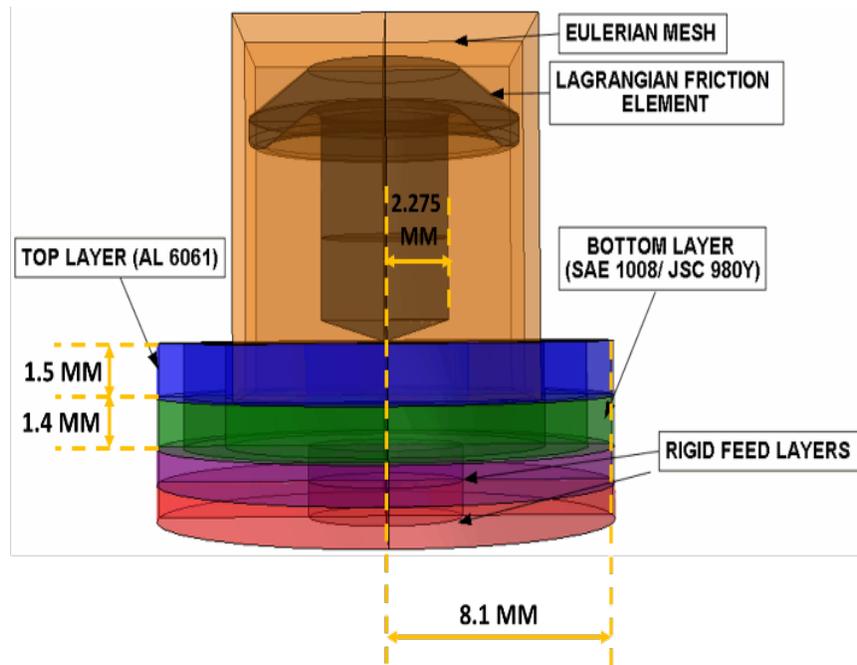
ASSEMBLY WITH DIMENSIONS OF DIFFERENT PARTS
